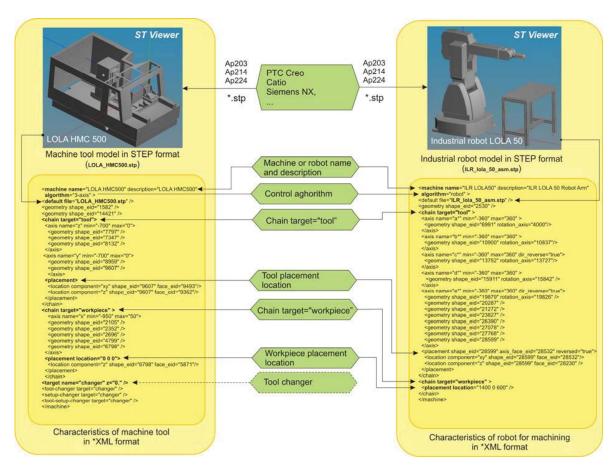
Configuring virtual machine and robots for machining in STEP-NC Machine environment [32]
